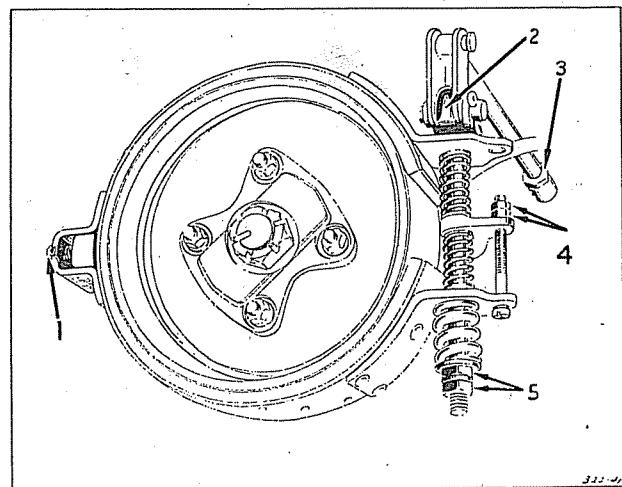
Hand Brake Adjustments, 1-08A, 2-26A, 2-33A.
